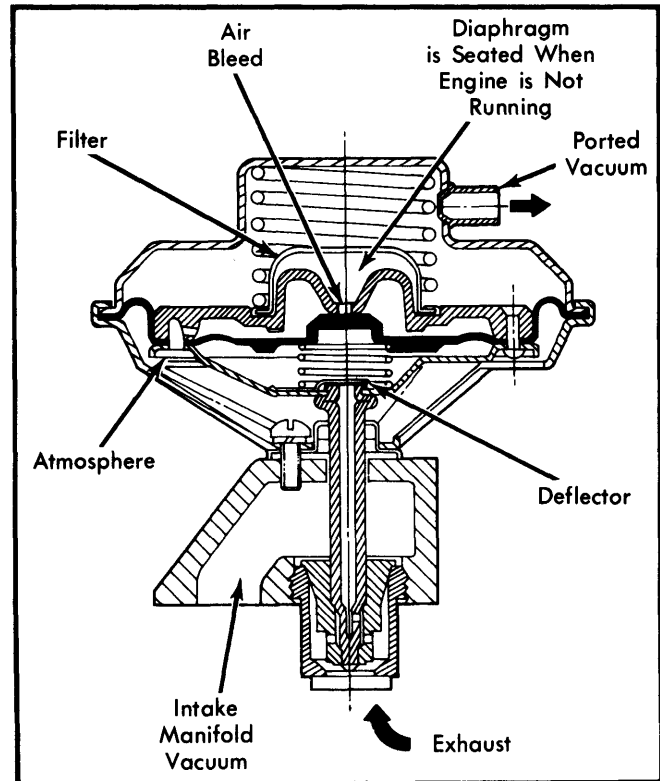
Cutaway View of Negative Transducer Back Pressure EGR Valve
